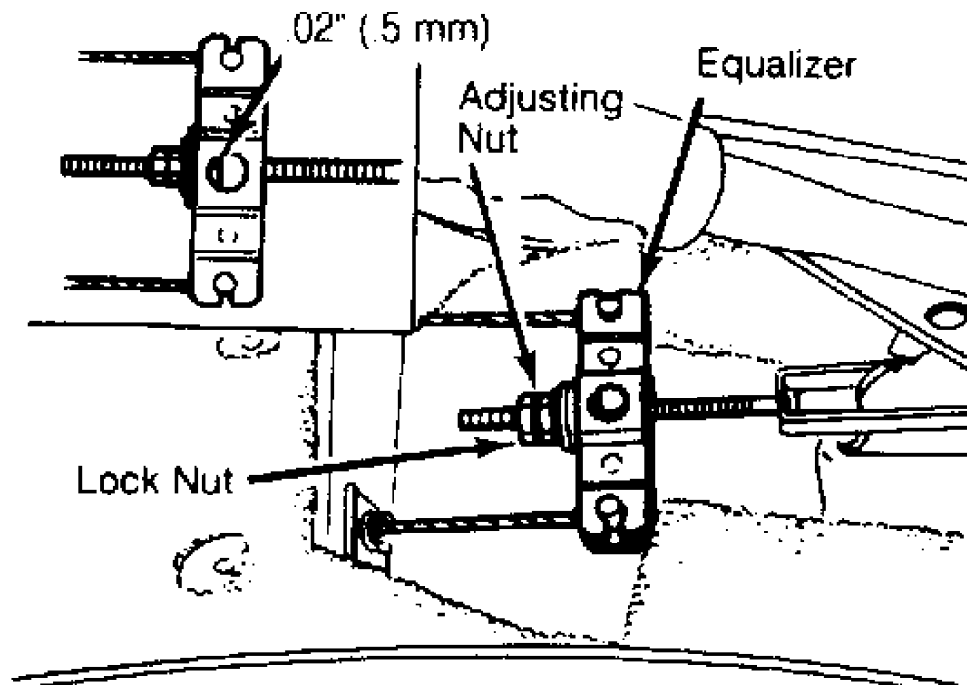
Adjusting Parking Brake (Legacy, Loyale & SVX)
